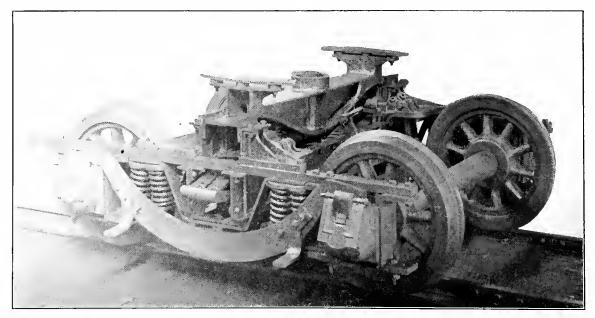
Four-Wheel Trailer Truck for Electric Motor Cars. Baldwin Locomotive Works.
